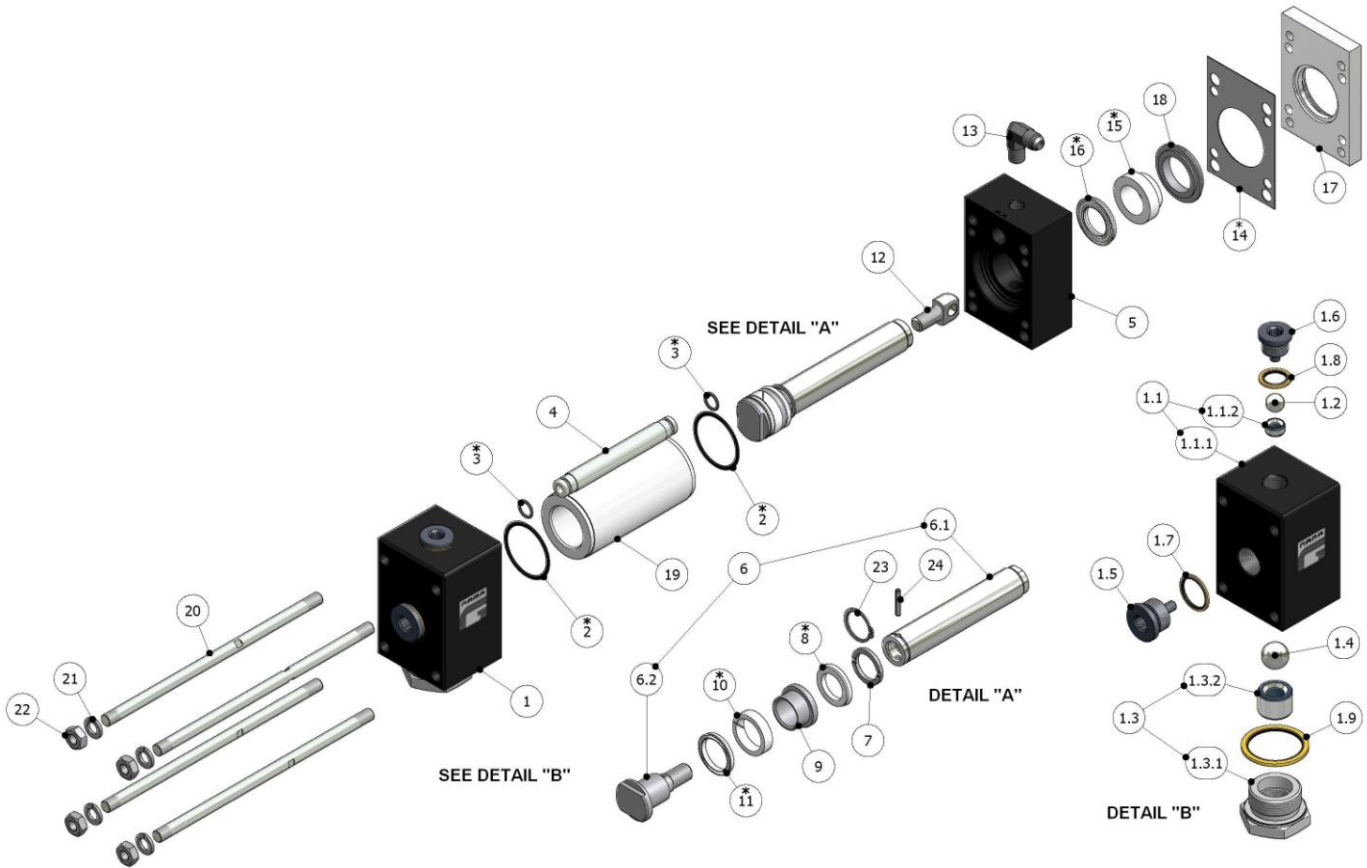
“A” Proportioning Pump Assembly, Exploded View
